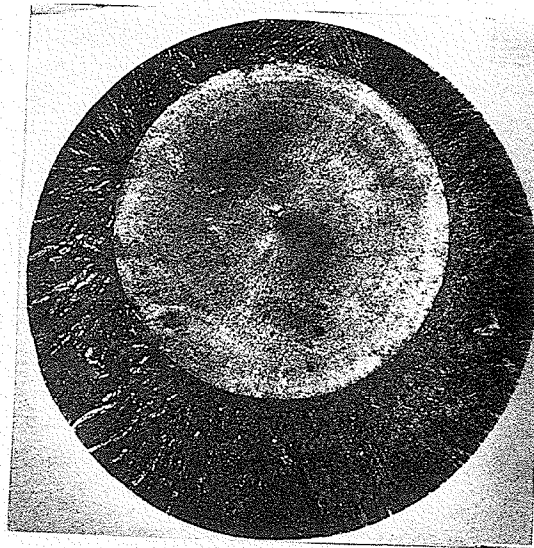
A tensile fatigue fracture which occurred in a piston rod of a forging hammer from the "flake" near the center (10)
